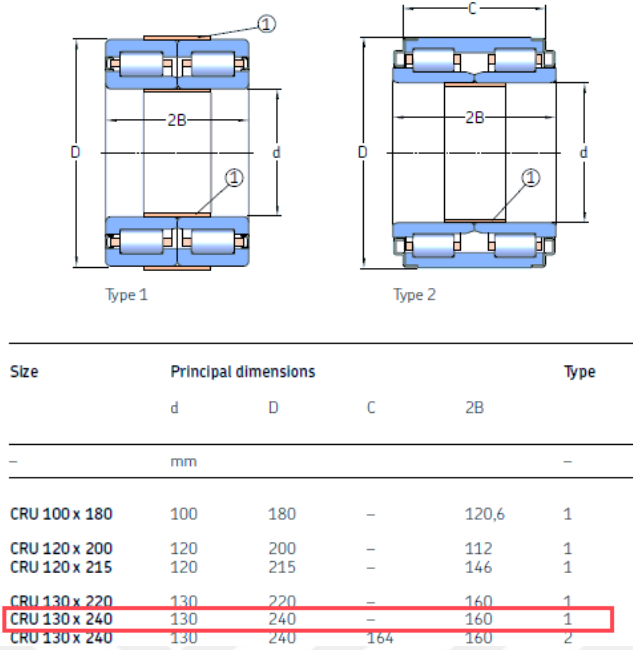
Principal dimensions of CRU 130 x 240 bearing unit
